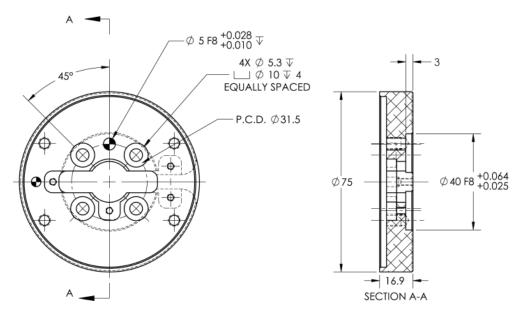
Coupling for ISO 9409-1-31.5-4-M5.
